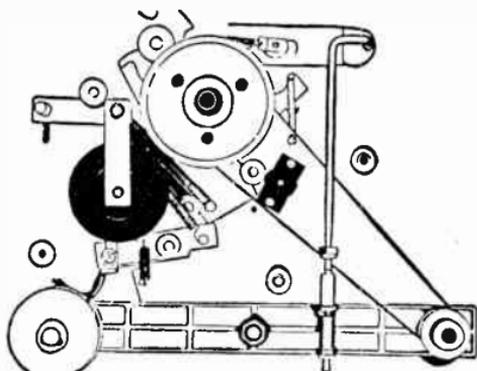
Illustrating how the rewind spindle in the lower right is driven by means of a chain belt from the motor in a typical recorder.
